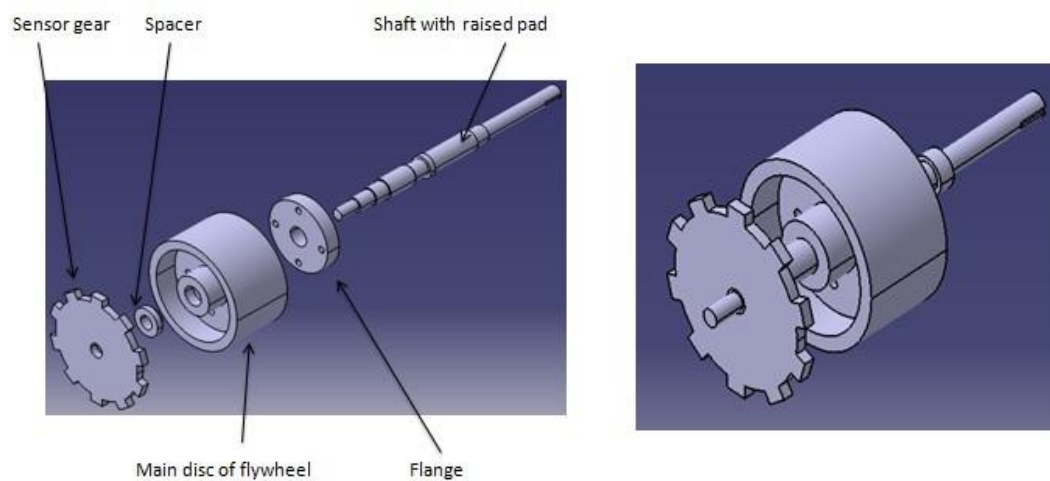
Main Disc, Shaft, Flange and Sensor Gear (Left); Assembled Flywheel Model (Right)
